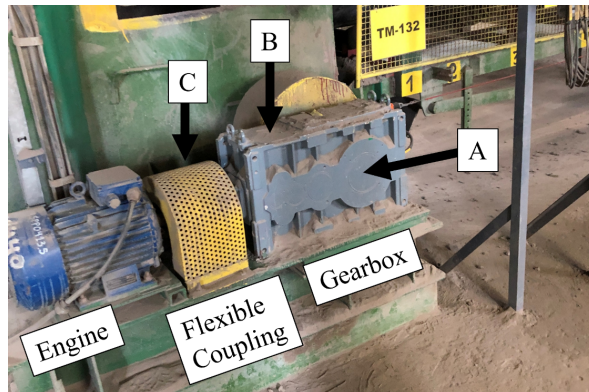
Conveyor drive with marked measurement points: A - front of gearbox casing, B - top of gearbox casing, C - top of a flexible coupling.
